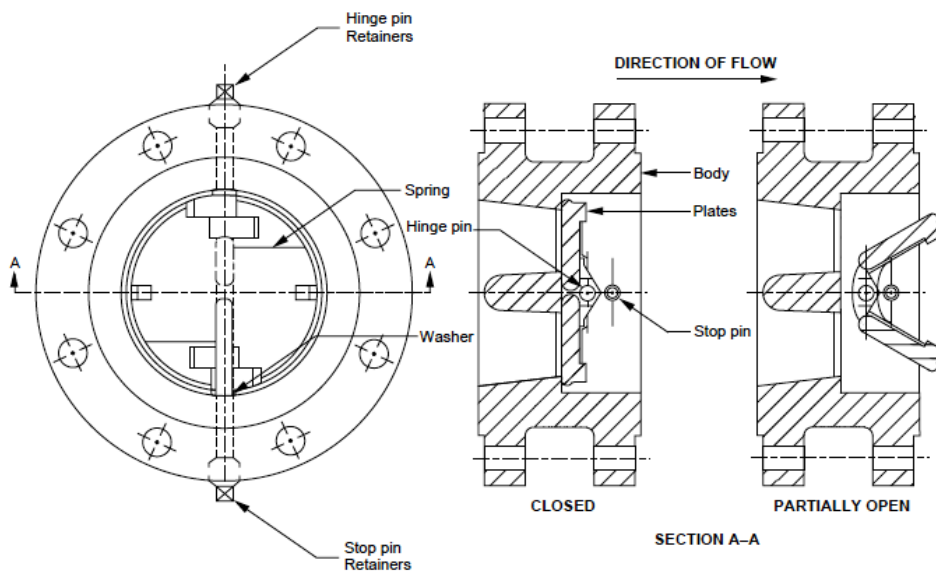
Typical Type 'A' Dual-plate Lug Check Valve
